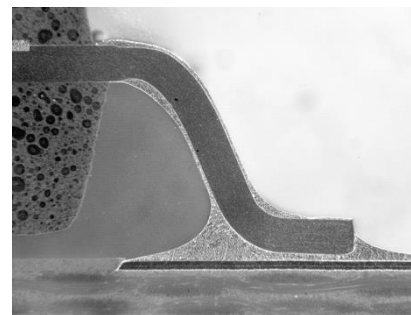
Good Solder joint cross section for QFP Gullwing lead
